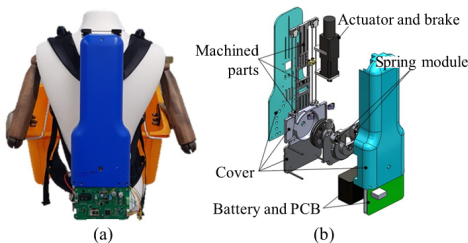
Mechanical design: (a) prototype and (b) exploded view
